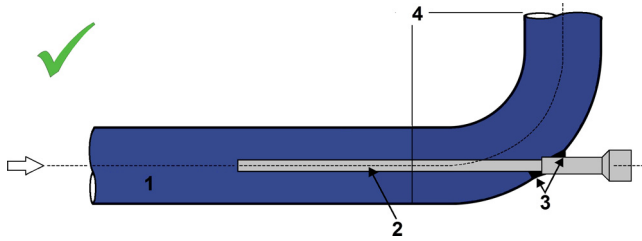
To avoid dead areas, the temperature probe (2) can be welded flush in the piping, in which the product flows (1) in the opposite direction. This may occur via an orbitally welded pocket. Attention should be given to the quality of the weld (3), which must be smooth and continuous. Welding of the temperature probe into the bend may be done off-line, after which the bend can be built permanently (by welding) or with dismantable joints into the piping system. In the latter case, the bend section is detachable (4) (Lelieveld et al., 2003; Hauser et al., 2007).
